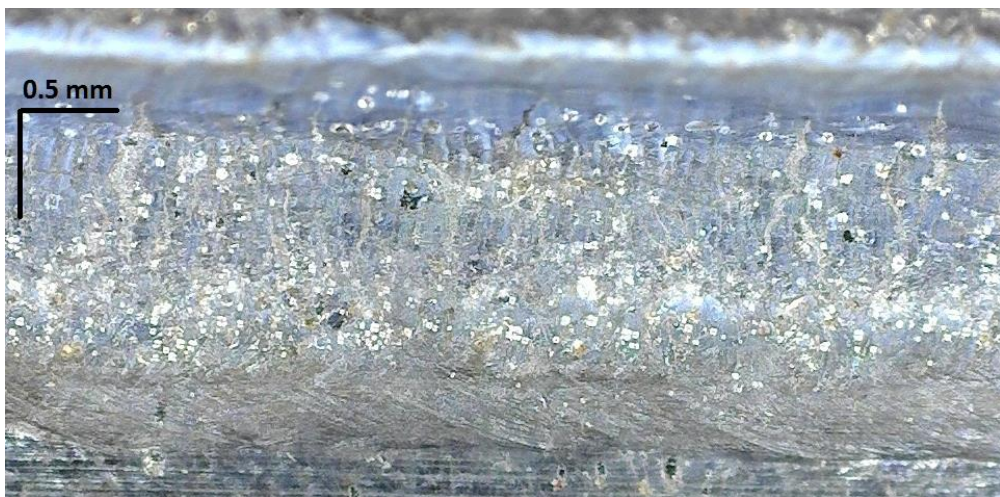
Picture of the weld 2 taken by an optical microscope
